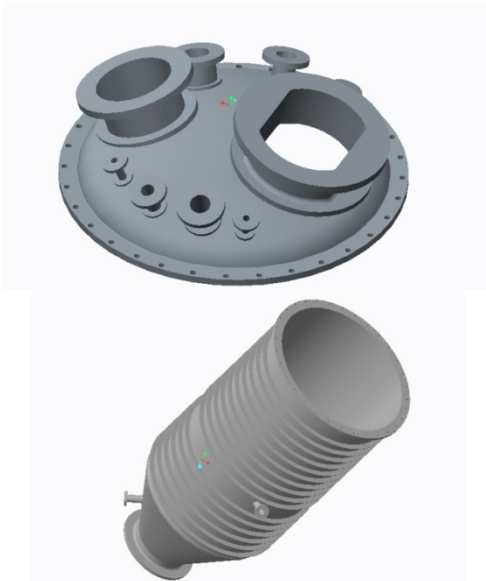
Geometric model of head with shell and having toriconical bottom.
